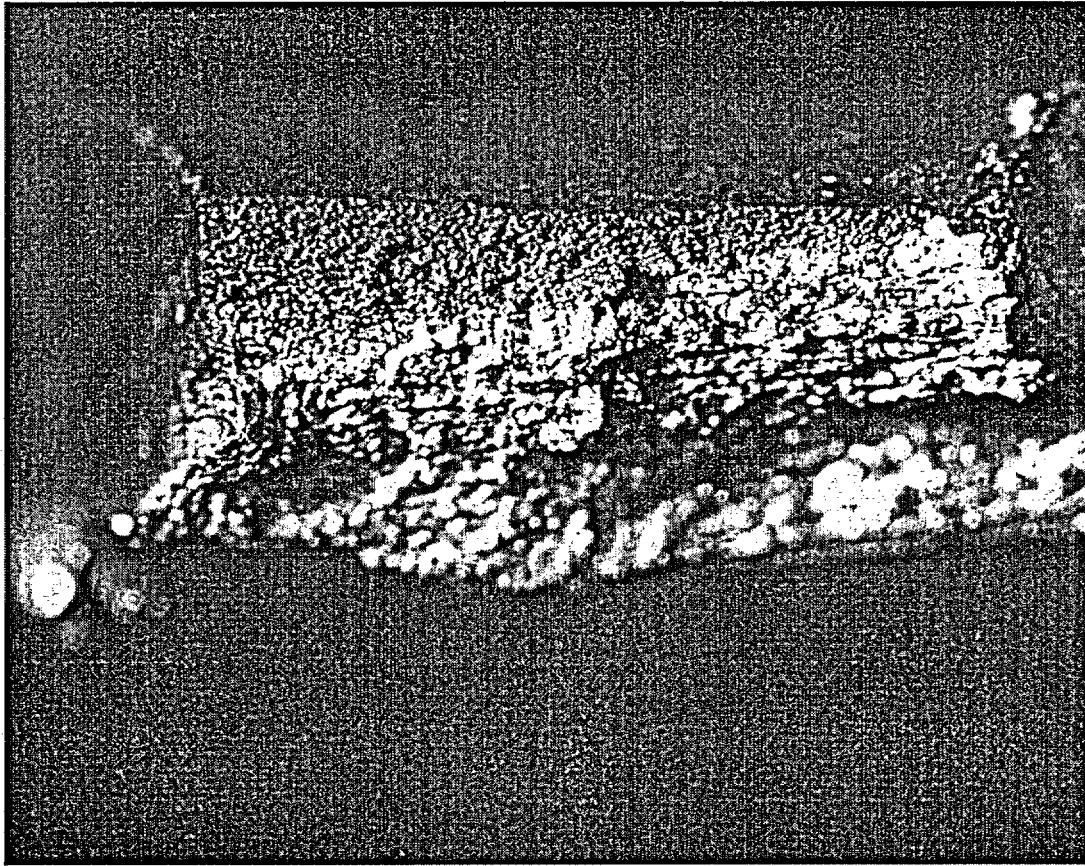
CCW fracture surface of upper half of section through crack at 25° on R44C45 in 2H TSP.
